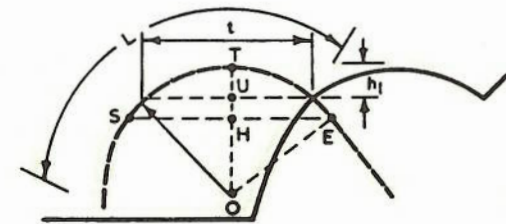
PLAN VIEW OF CUTTING TOOL SHOWING PEAK-TO-VALLEY HEIGHT AND ACTIVE LENGTH OF CUTTING EDGE.
